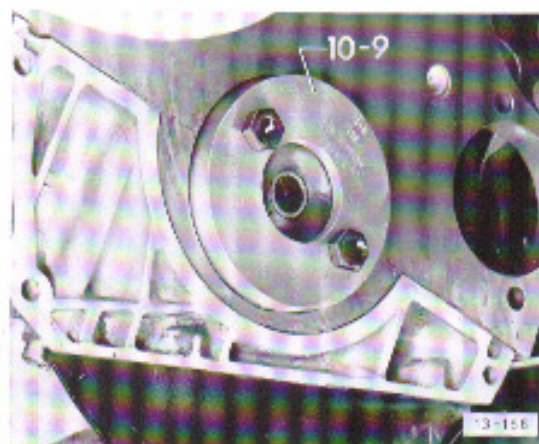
Installing crankshaft oil seal, flywheel end Oil lips tight y.
